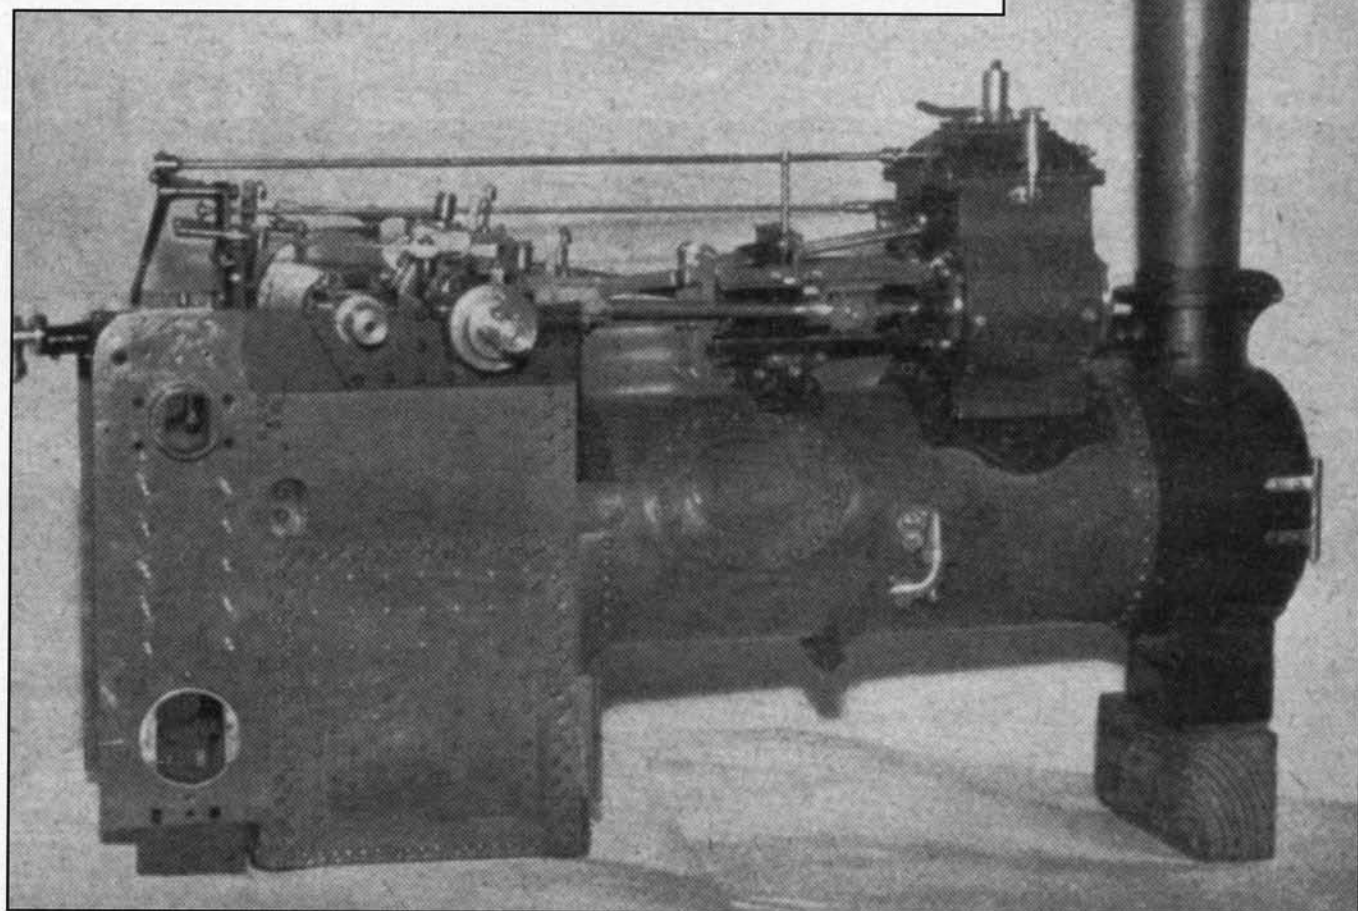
Right-hand side of engine. Note provision for compensating gear to enable rear axle and third shaft to move together on the springs
